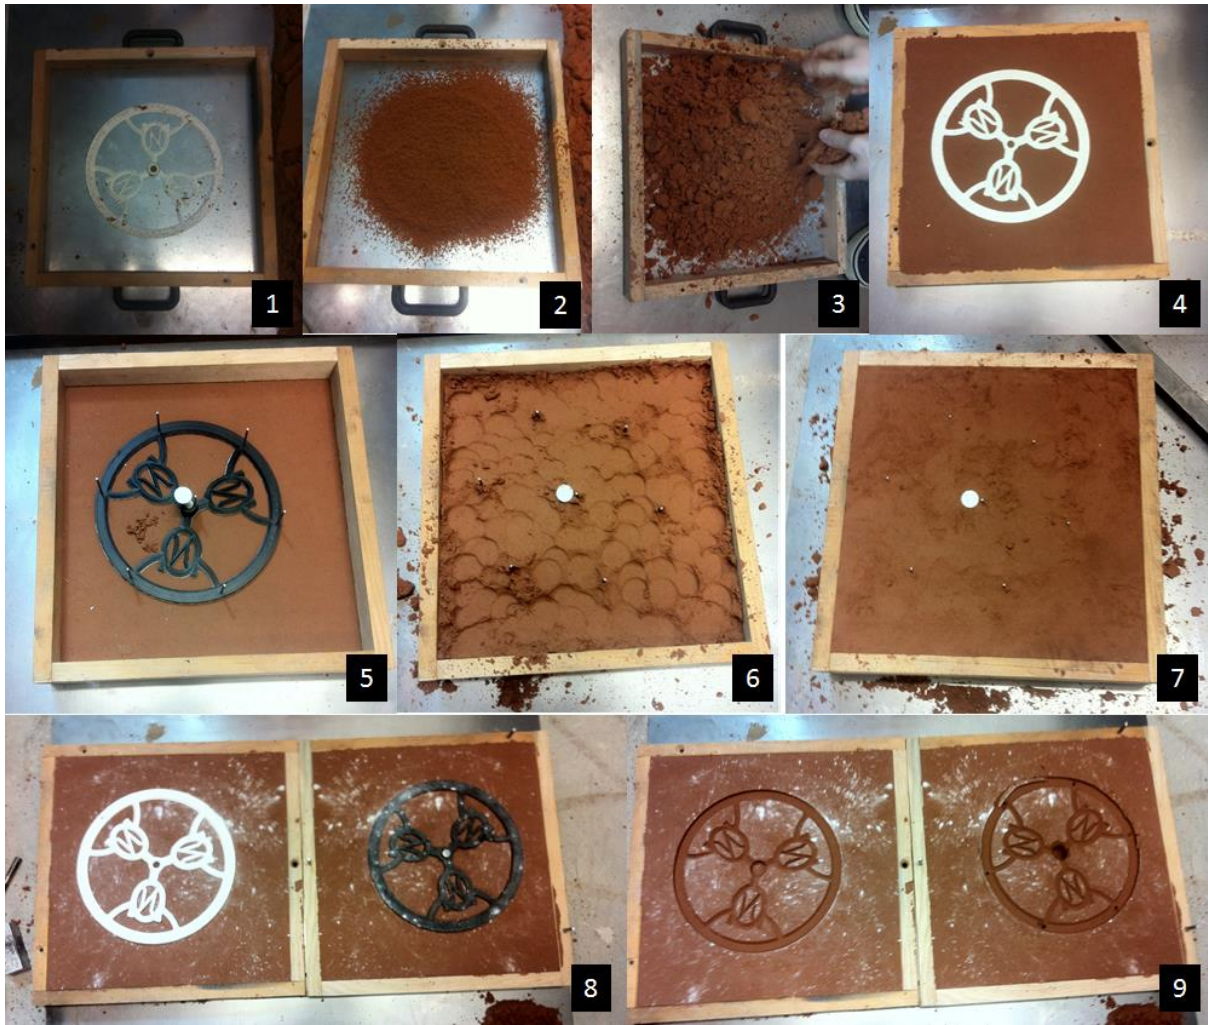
Forming Uno Pulley Wheel Sandcasting Cavity Using 3D Printed Pattern
